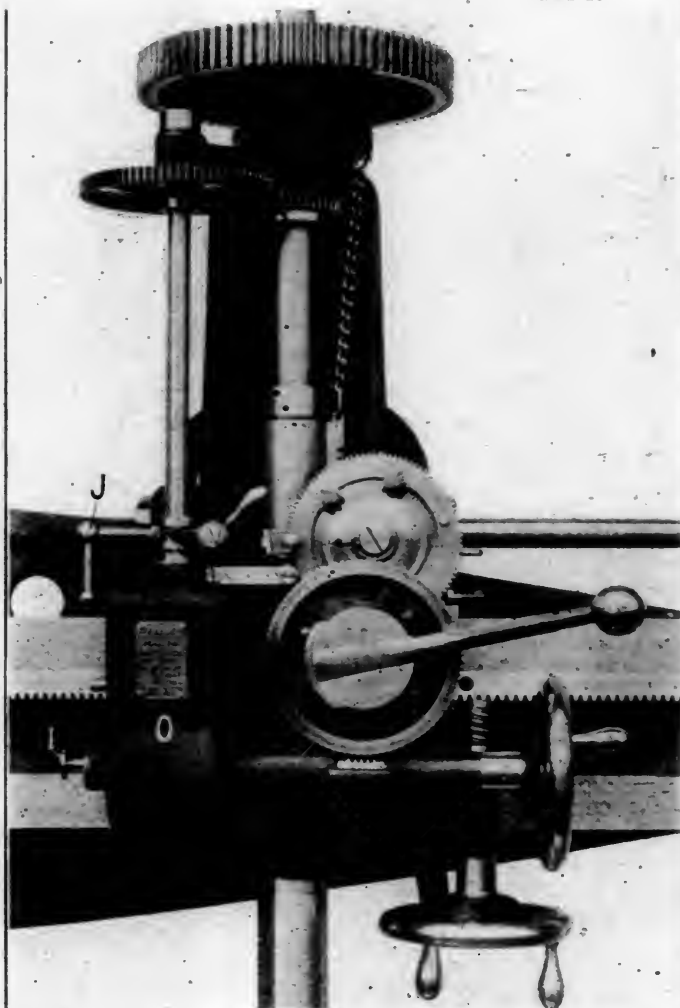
VIEW OF THE HEAD SHOWING ARRANGEMENT OF THE FEED GEAR BOX AT THE LEFT OF THE SPINDLE.
